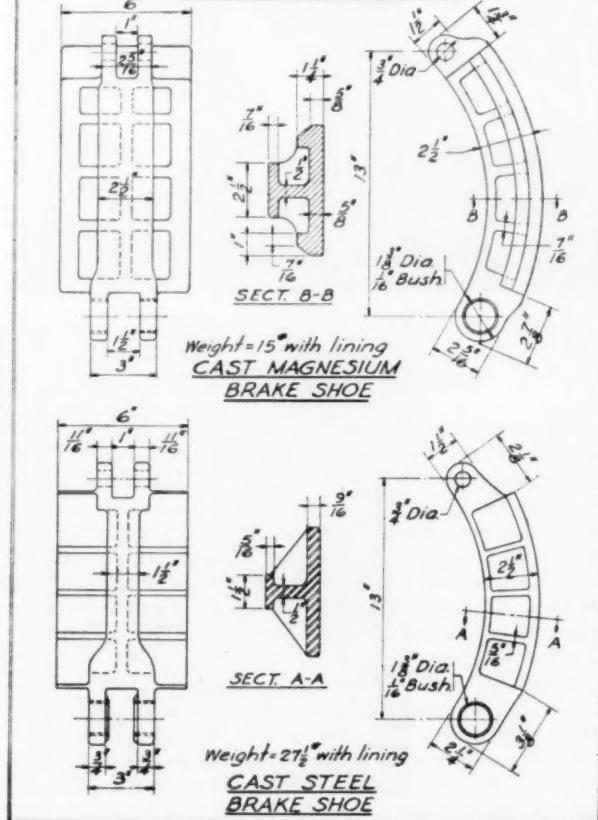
TYPICAL REDESIGN OF A STEEL PART AS A MAGNESIUM CASTING
